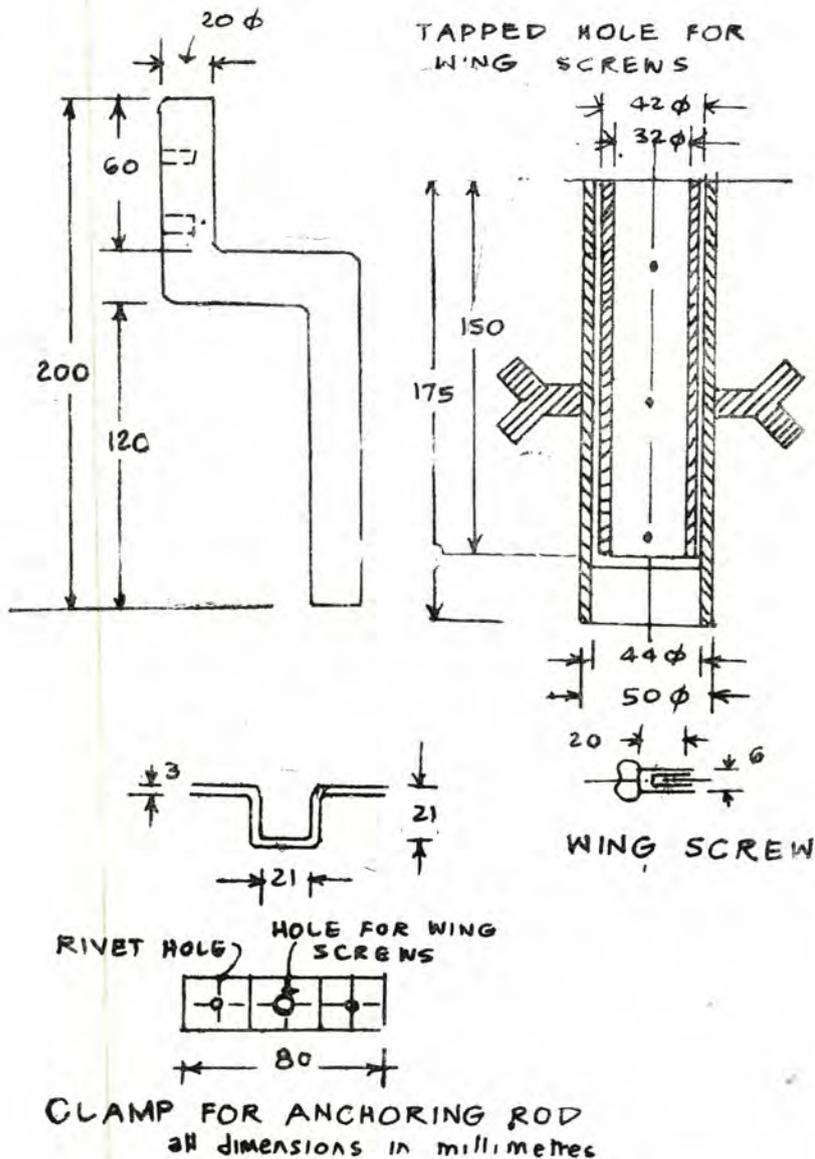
TYPICAL DETAIL OF ANCHORING ROD DEVICE.
